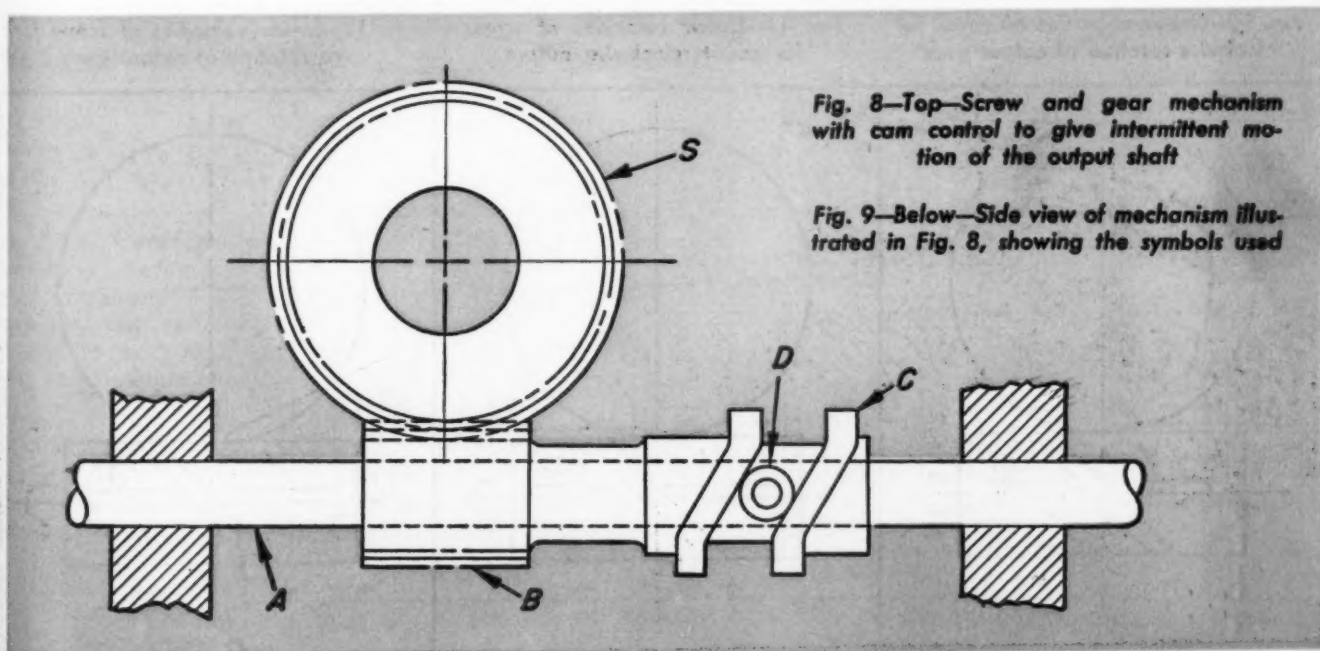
Top—Screw and gear mechanism with cam control to give intermittent motion of the output shaft
